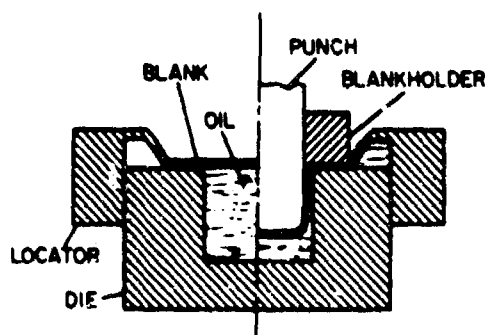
Deep drawing with fluid-film conditions between the die and the blank [2, 3].
